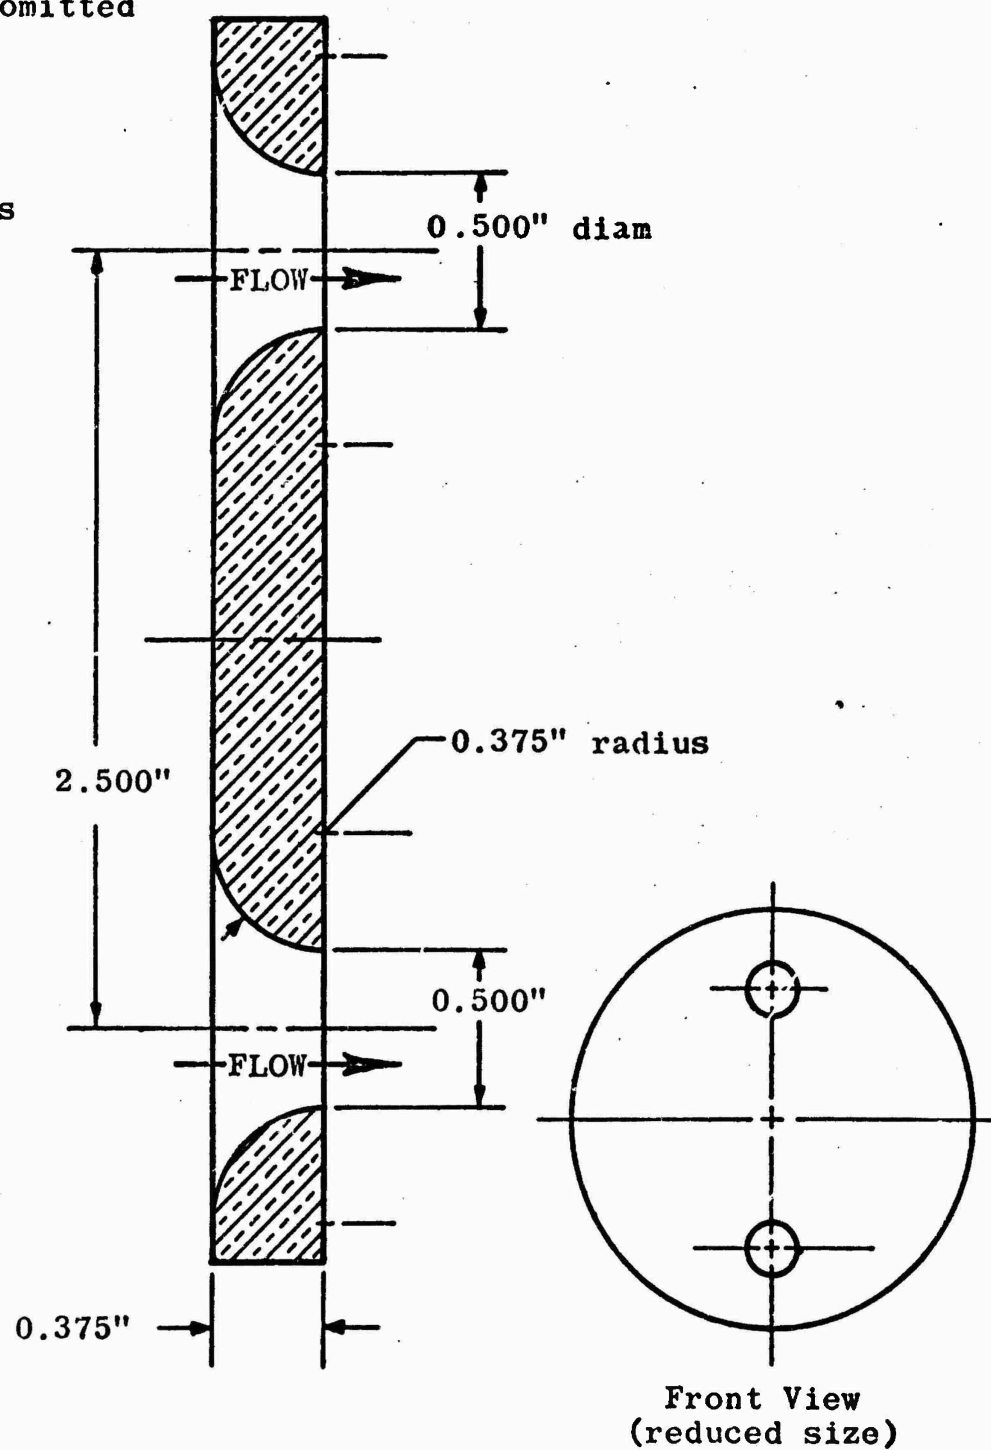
TWO 0.500 INCH DIAMETER NOZZLES 2.500 INCHES
